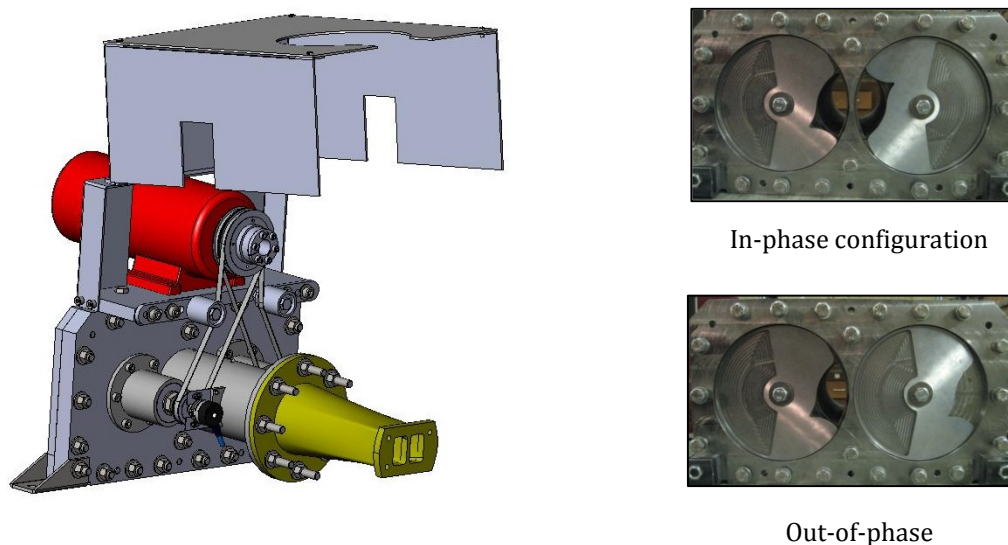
CAD drawing of the pulse generator shown with photographs of chopper plate configurations
